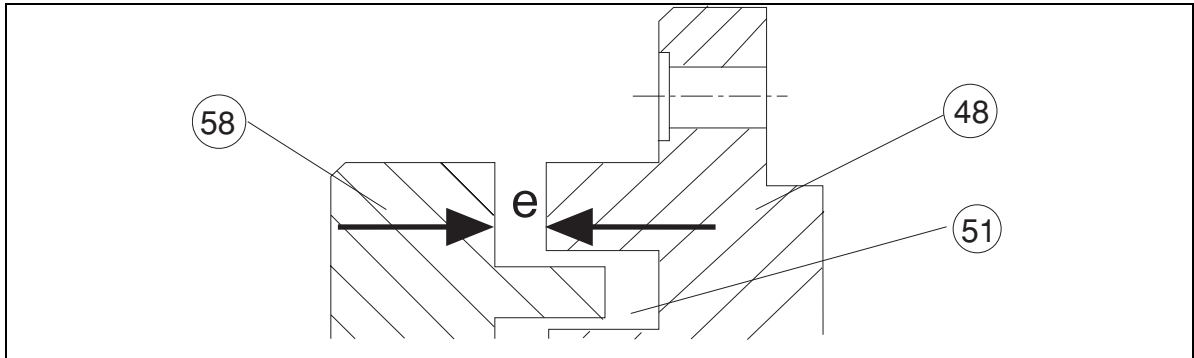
Clearance between dust flinger and rigid labyrinth seal
